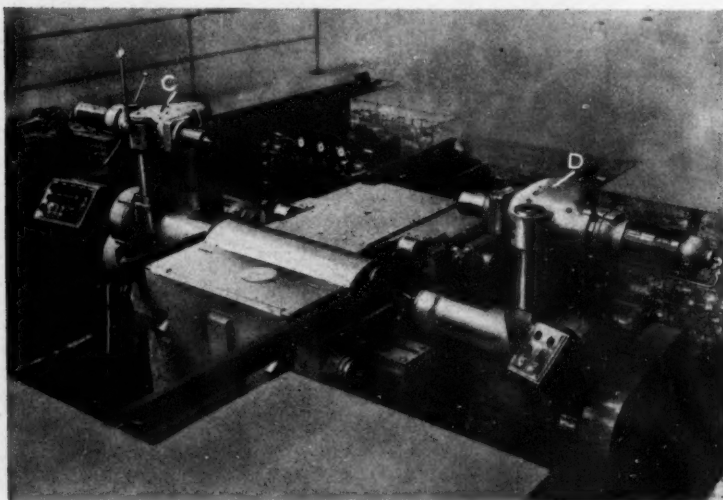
Atlas Standard Profiling Machine for Railway Wheels
